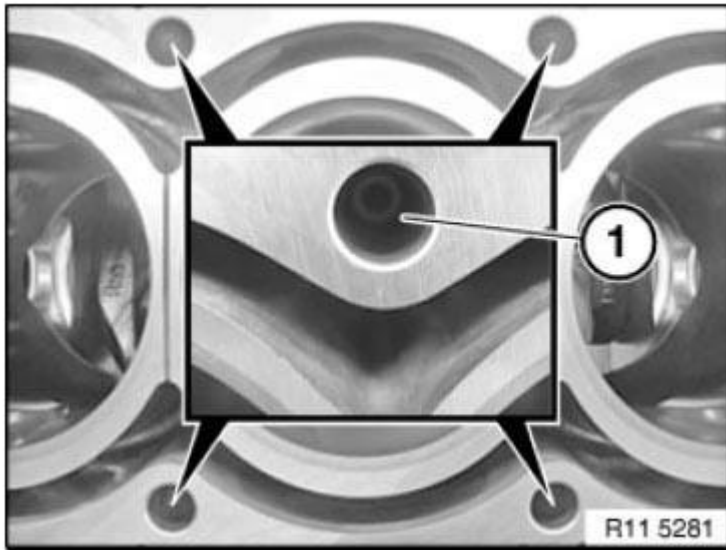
Ensure There Is No Coolant, Water Or Engine Oil In Threaded Hole
